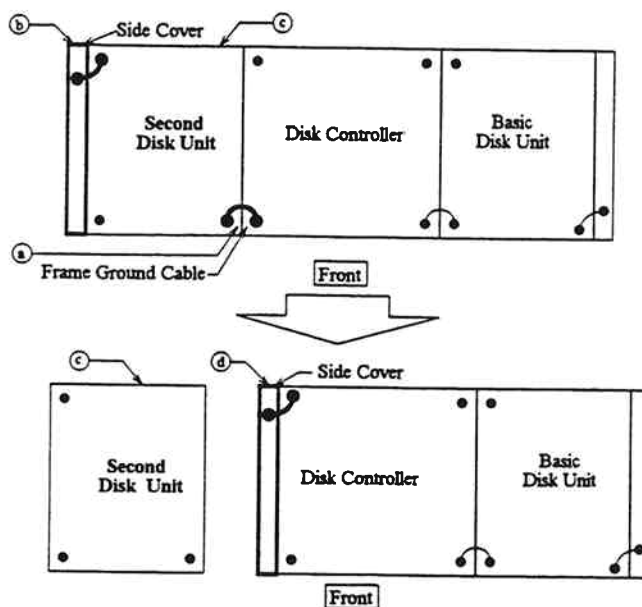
Removal of Frame Ground Cable
